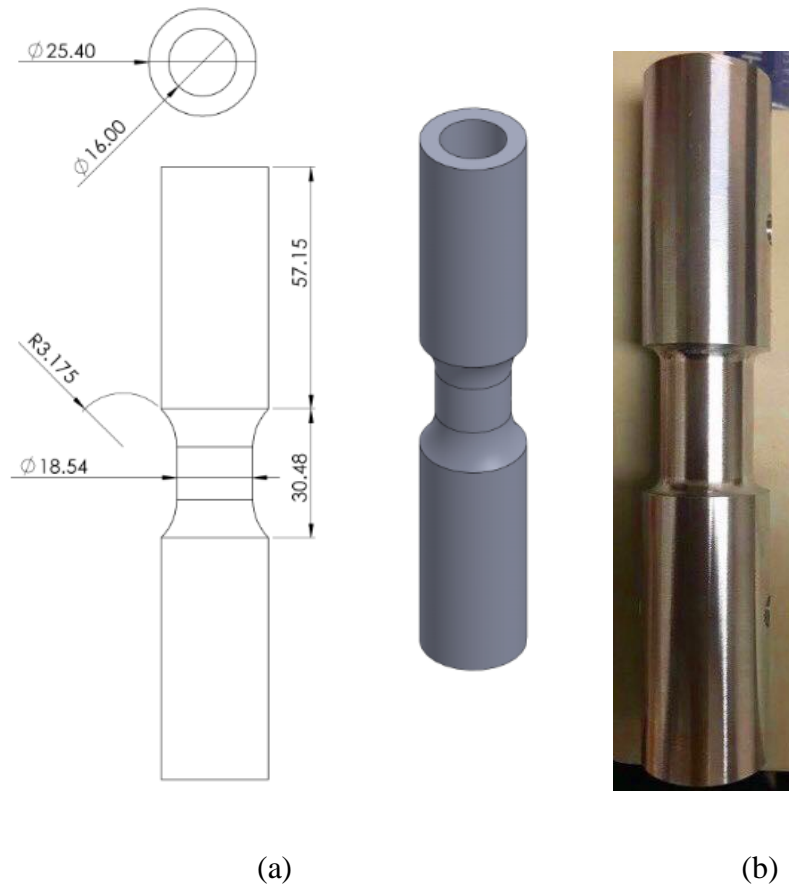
Tubular specimen constructed in the longitudinal direction (LDT) from original bar (a) drawing of the test section, and (b) photograph of the test section. All units in mm.
